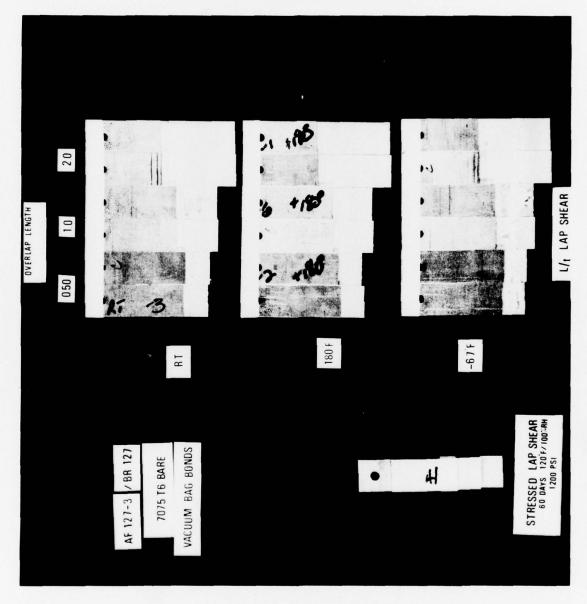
Specimen Failure Surfaces—AF 127-3, PasaJell 105, Vacuum Bag Bonds
